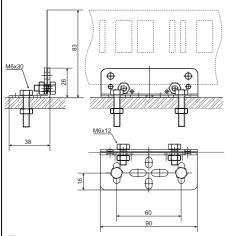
Screw-on mounting bracket, straight section (WCS-MB1)
